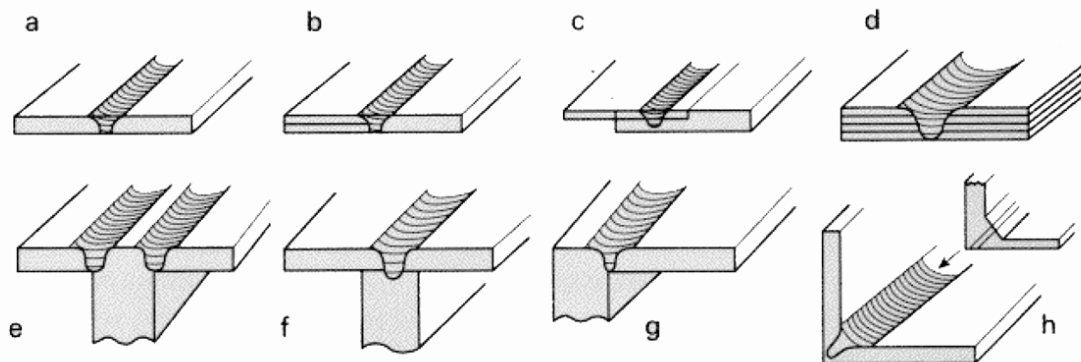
Typical Joint Configurations for Friction Stir Welds
